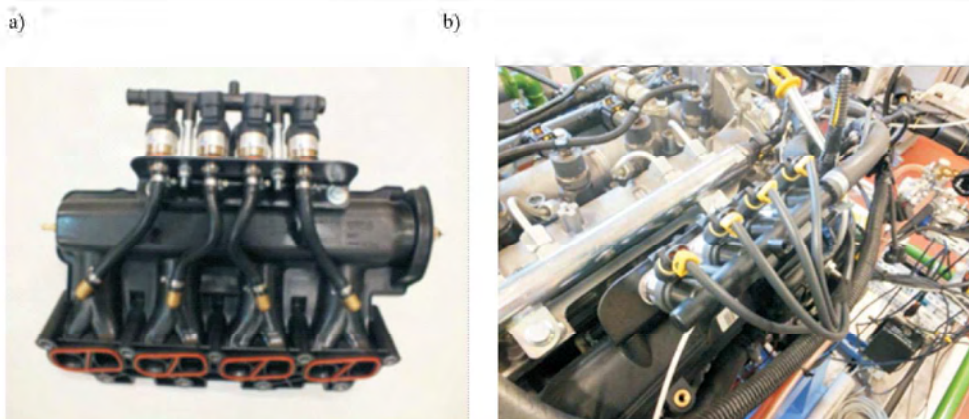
Intake manifold of the Fiat 1.3 MJT engine with the gas injectors: a) before fitting, b) fitted in the engine
